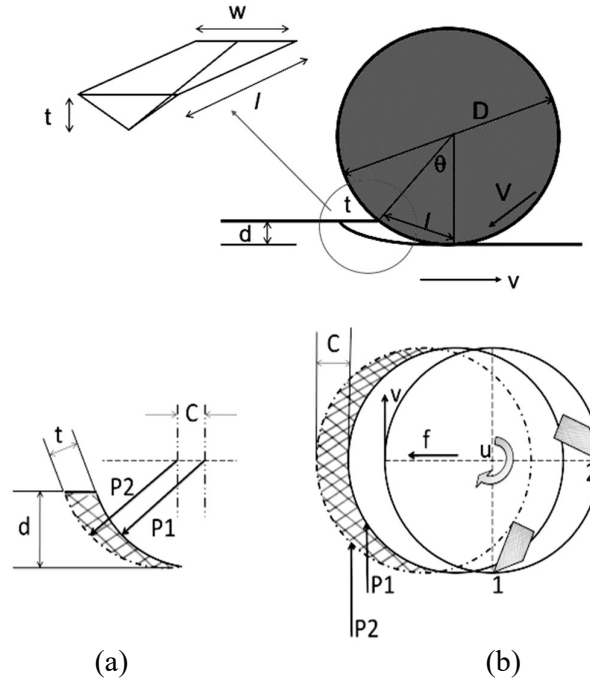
(a) Grinding chip formation geometry and (b) one chip geometry
